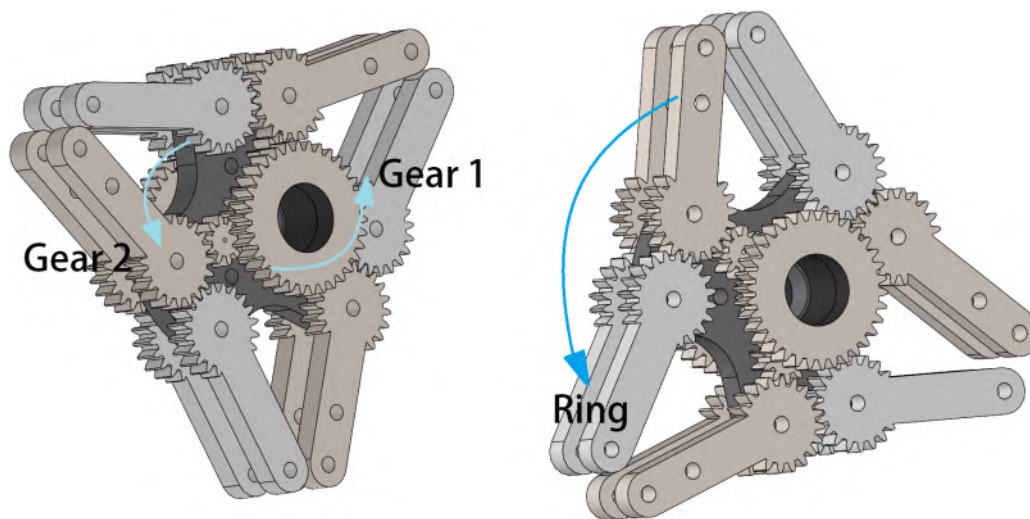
When Gear 1 and Gear 2 are rotating in the same direction, the whole Ring mechanism will rotate and allow for the selection of which module/sensor to deploy. In this design, three options are provided, as shown in Figure 6.9.
